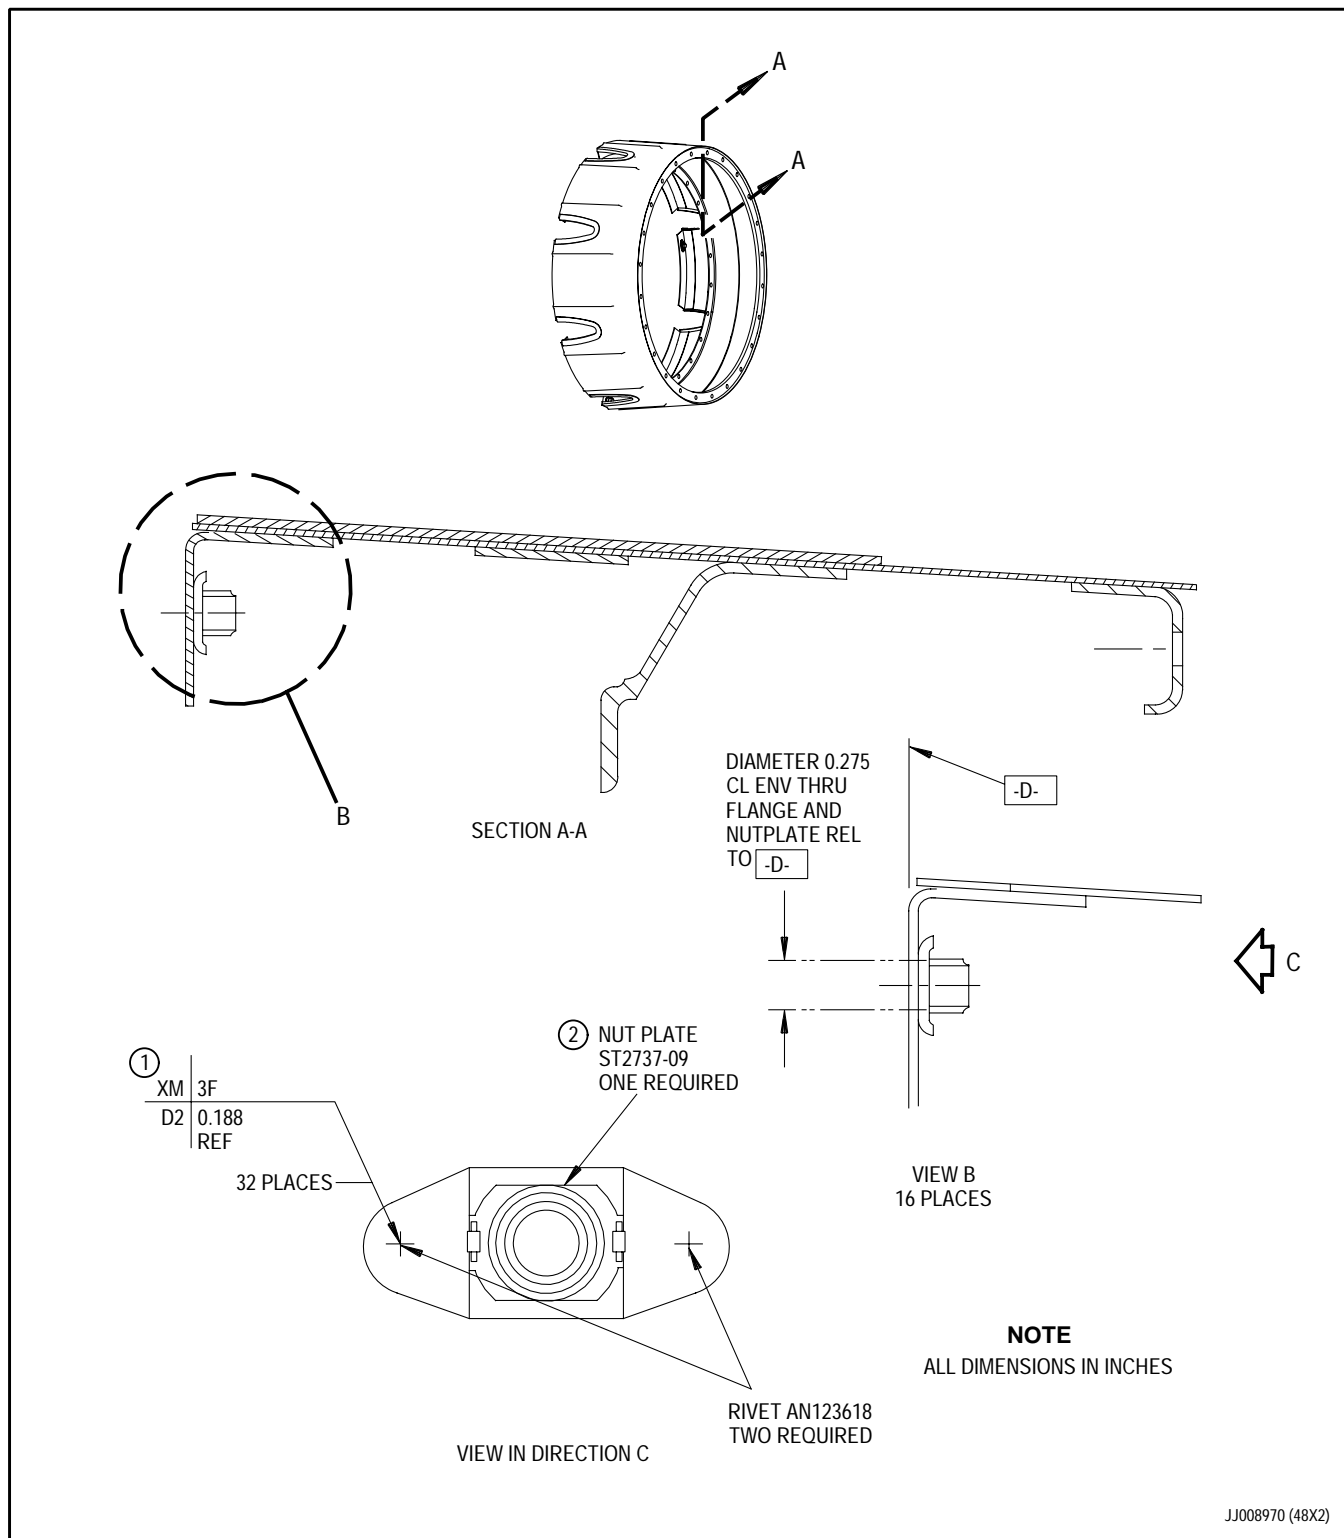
Rear Turbine Exhaust Duct Assembly - Nut Plate Replacement
